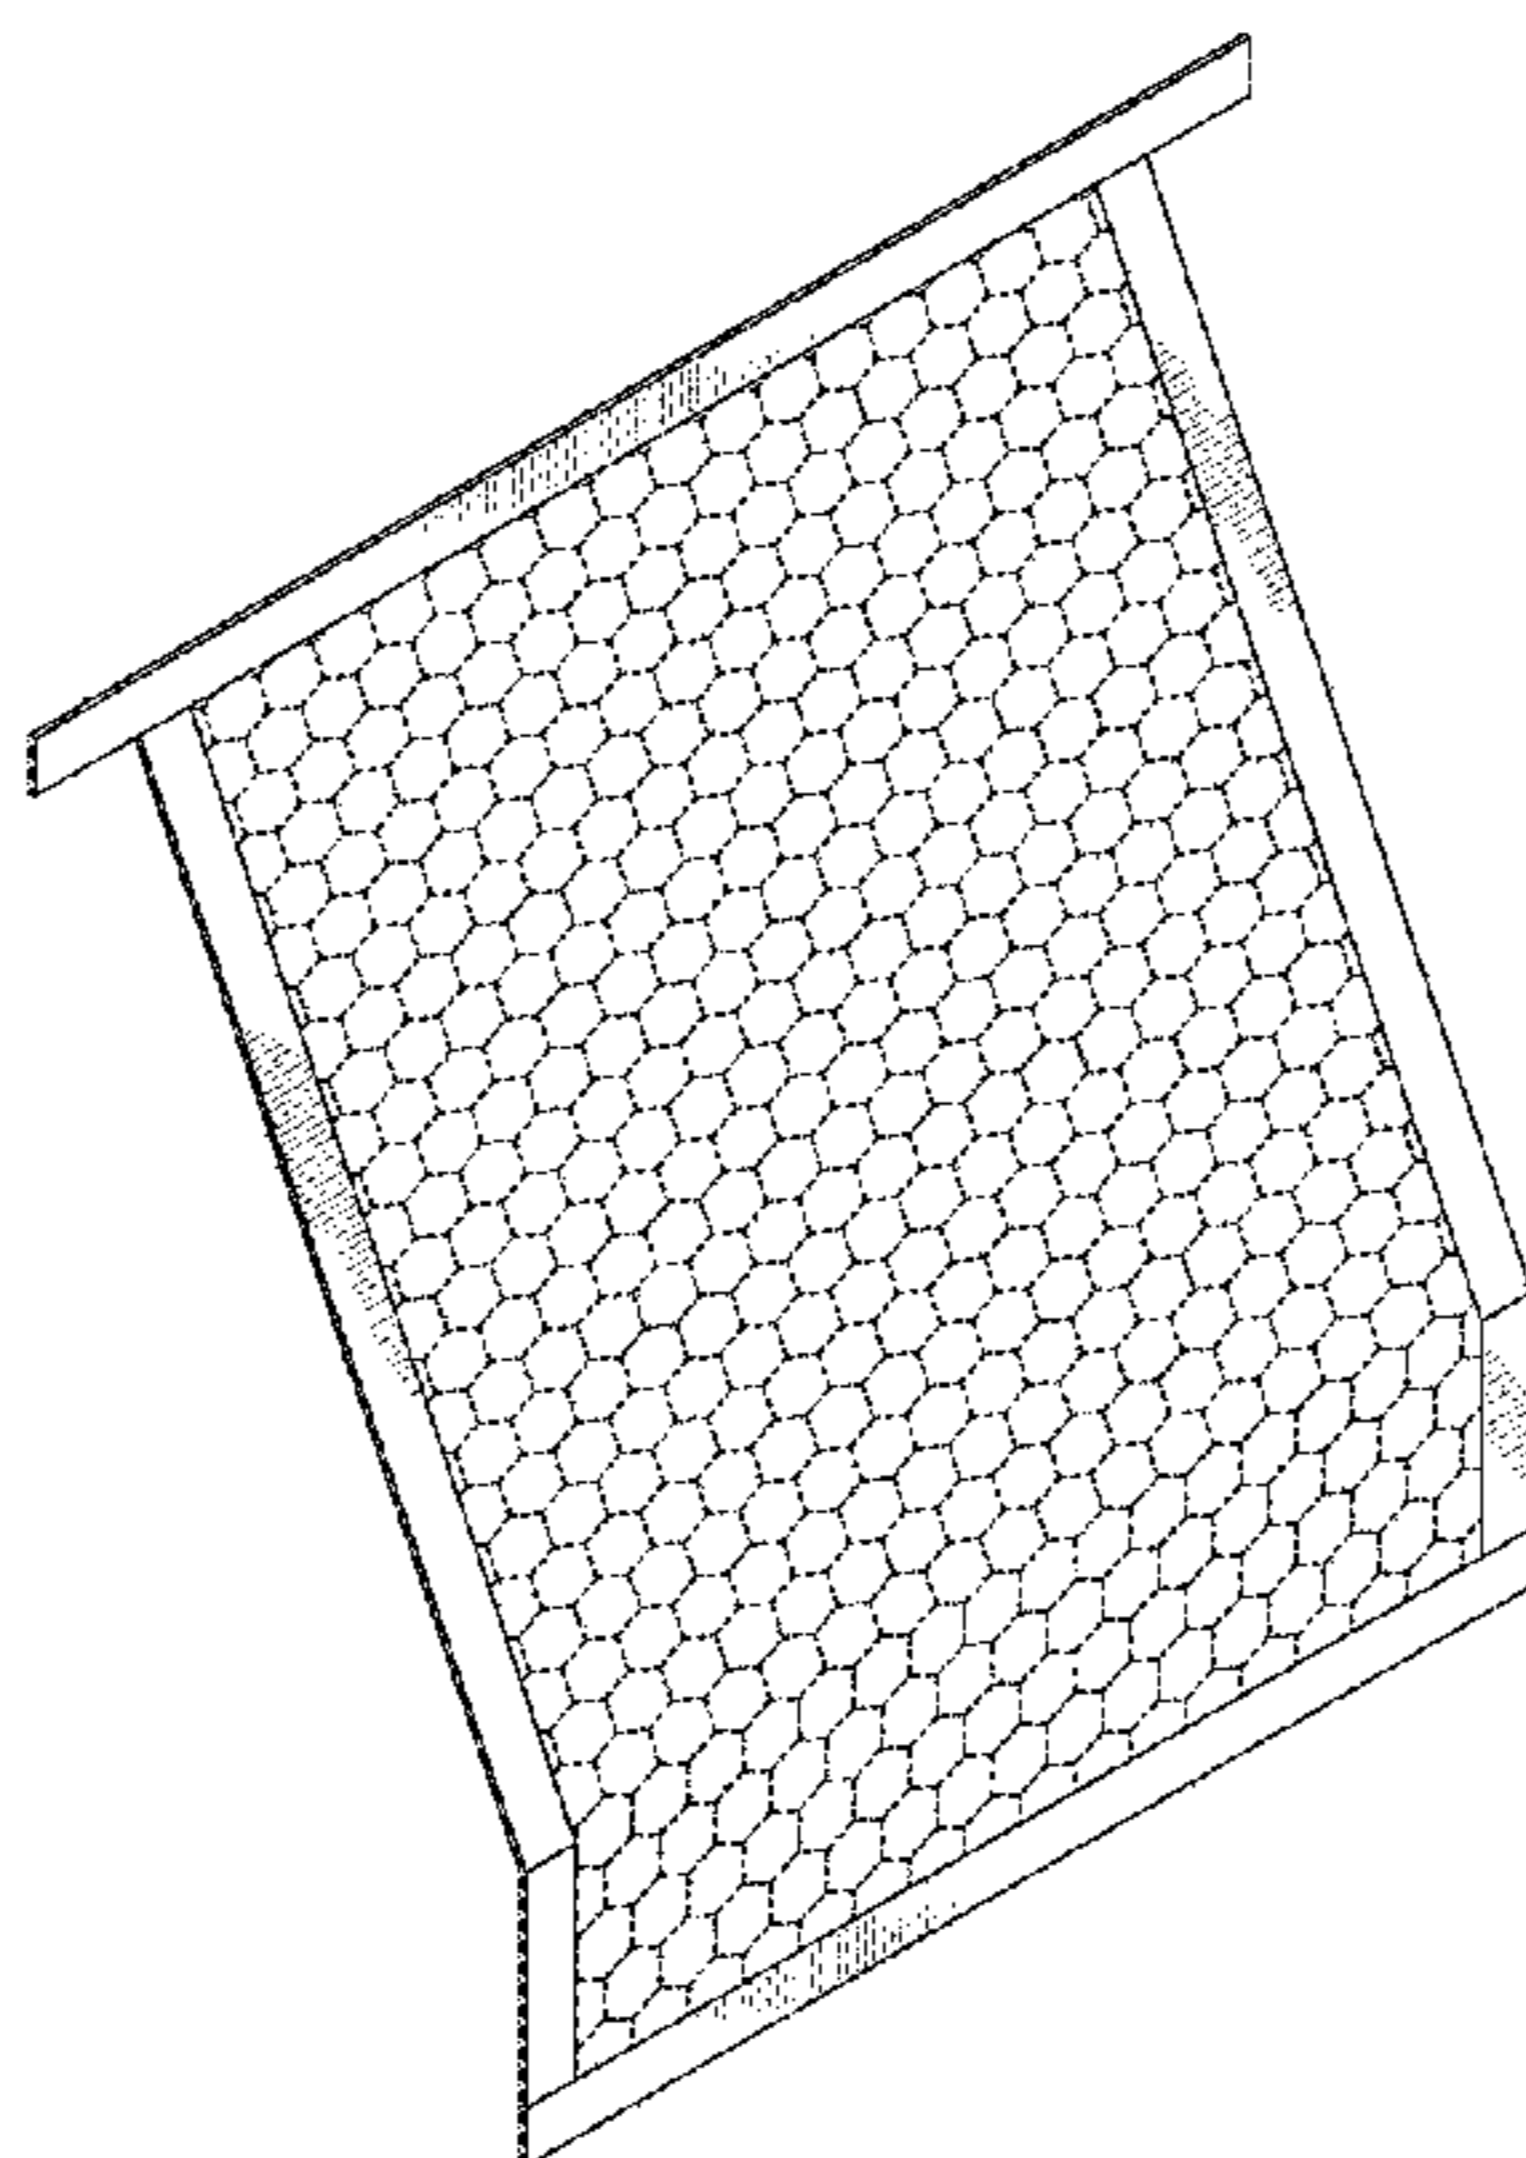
is a side elevational view of the frame assembly of FIG. 1;
